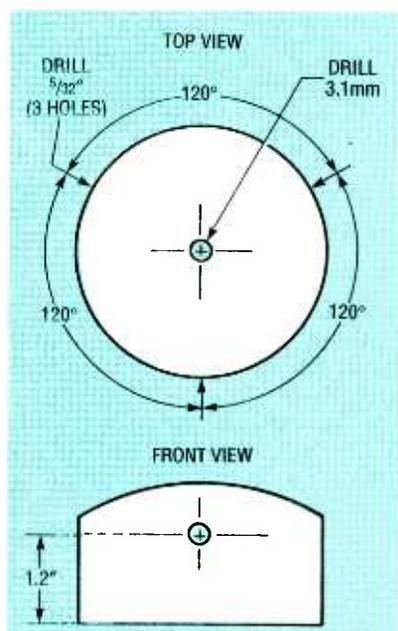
ANEMOMETER ROTATING CAP. Drill three $\frac{5}{32}$ -inch holes, evenly spaced, in a 2-inch PVC end cap, 1.2 inches up from the open end of the cap. Drill one 3.1 mm hole in the exact center of the top of the cap.
